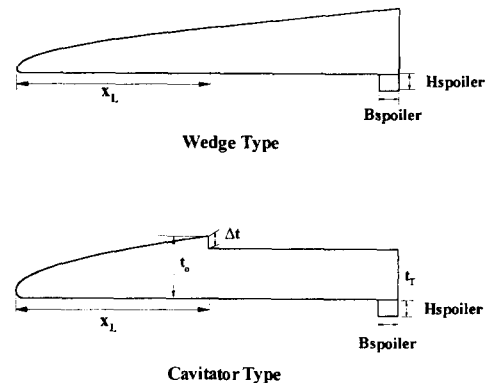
Drawing of the applied blade sections. (wedge type and cavitator type)
